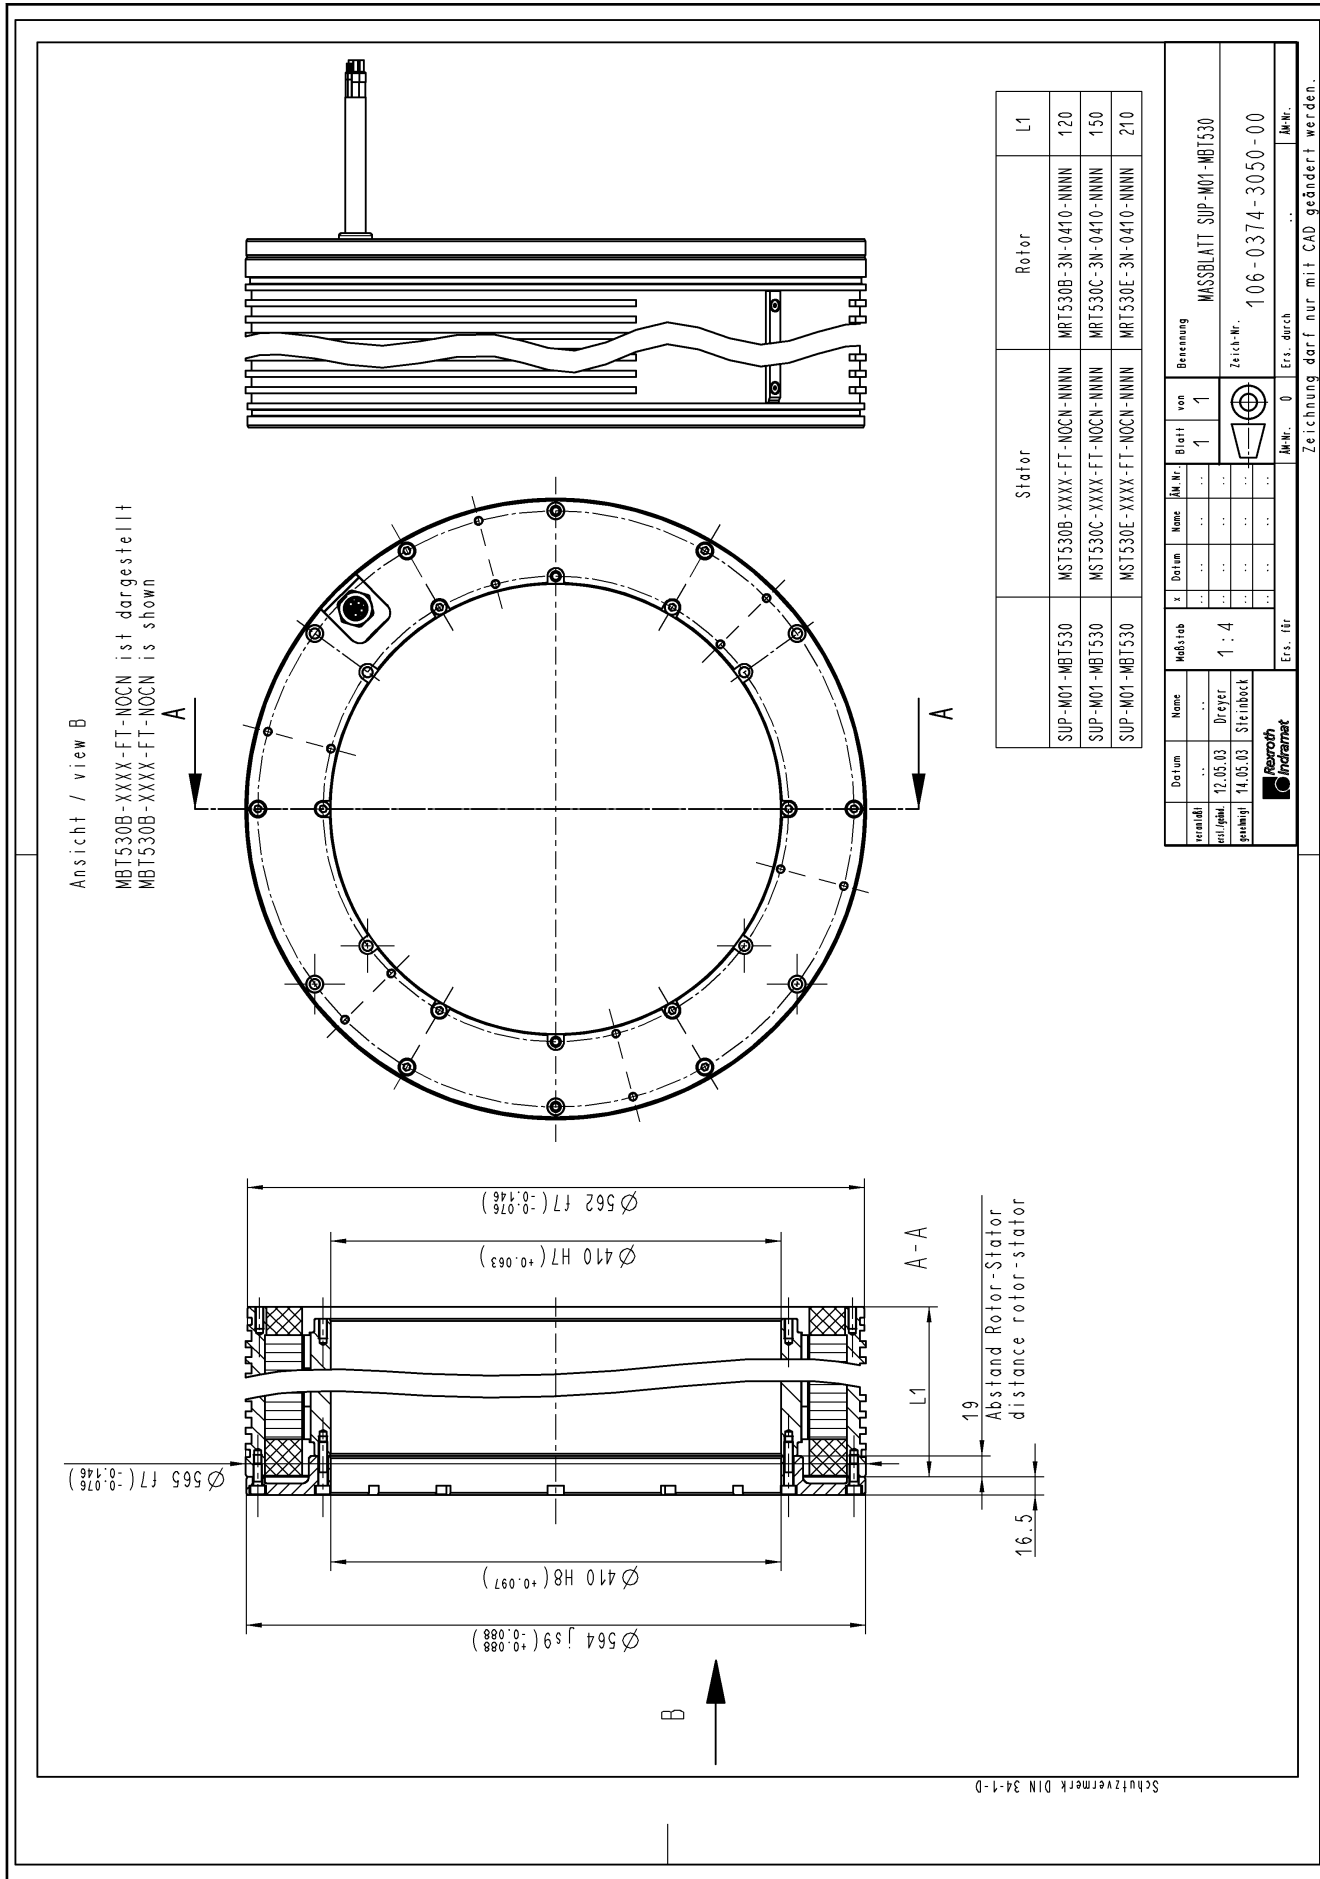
Dimension sheet for mounting ring in SUP-M01-MBT530
